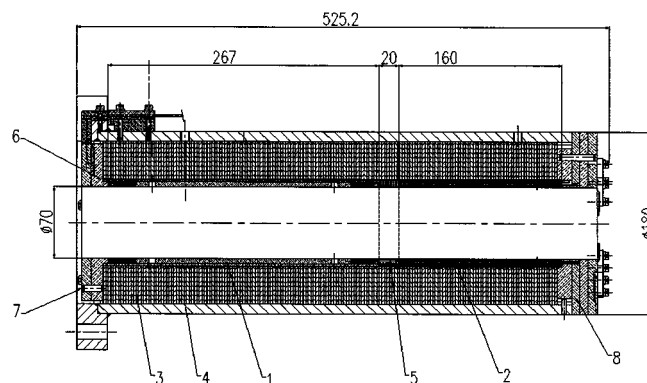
Longitudinal section of the MQSXA assembly: (1) skew quadrupole winding (MQSX), (2) skew octupole (MCOSX), octupole (MCOX), and skew sextupole (MCSSX) windings (see also Fig. 2), (3) Yoke laminations, (4) stainless steel outer shell, (5) EP GC3 spacer, (6) MQSX connection plate, (7) alignment pin, (8) connection plates of the nested windings.
